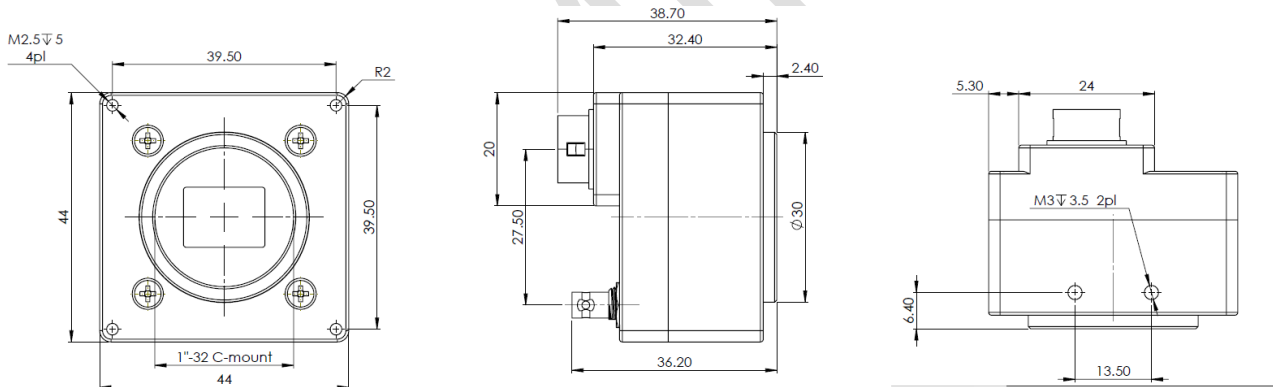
Iron CoaXPress/SDI with GPIO and pane-tilt correction mechanical dimensions
